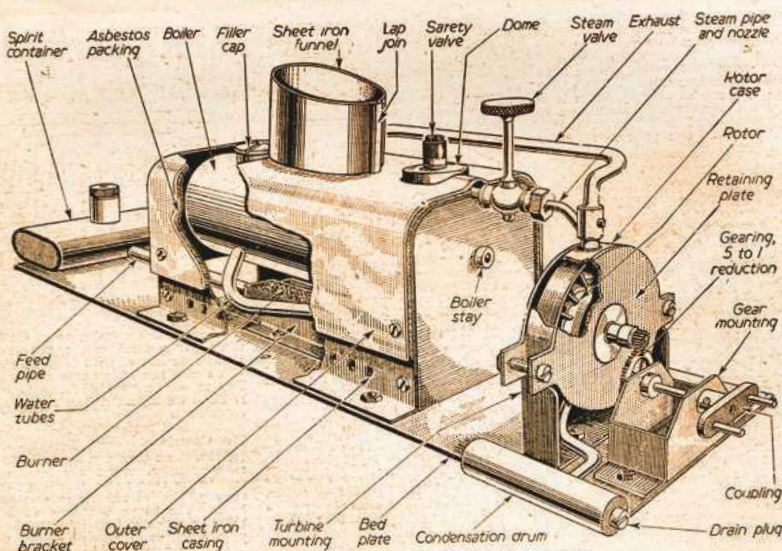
Part sectional view of the steam turbine unit for a model boat.
